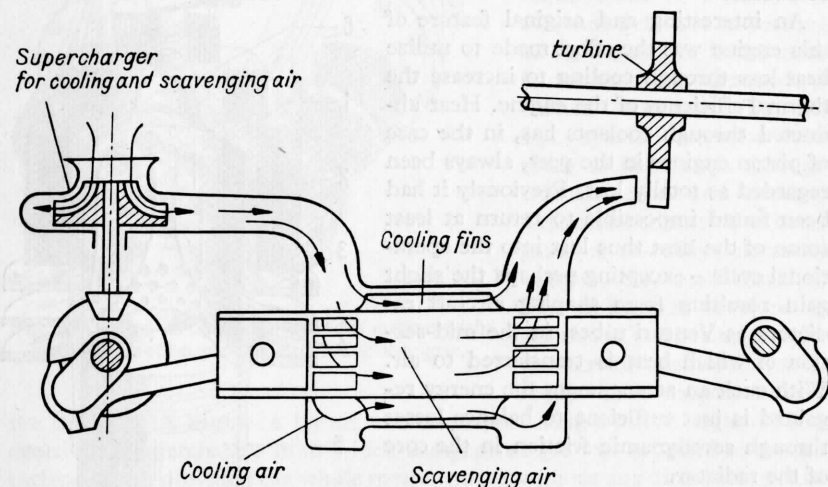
Arrangement of air supply in a two-stroke aircraft engine.
